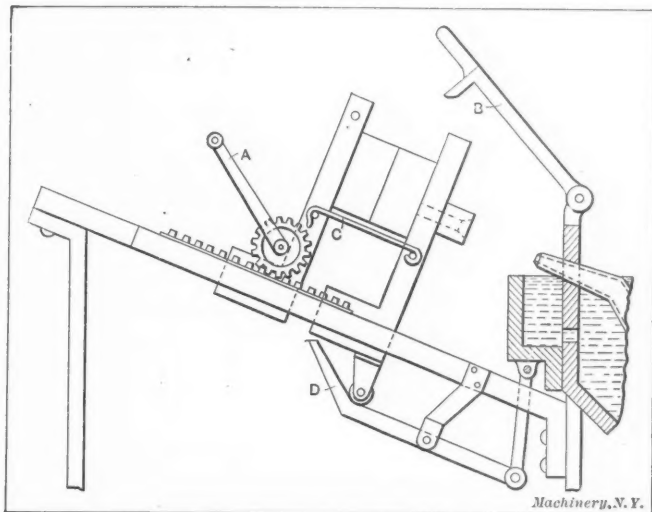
Rack and Pinion used to part the Mold and draw it away from the Spout
